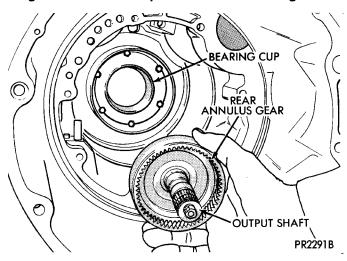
Remove Output Shaft and Rear Annulus Gear Assembly
